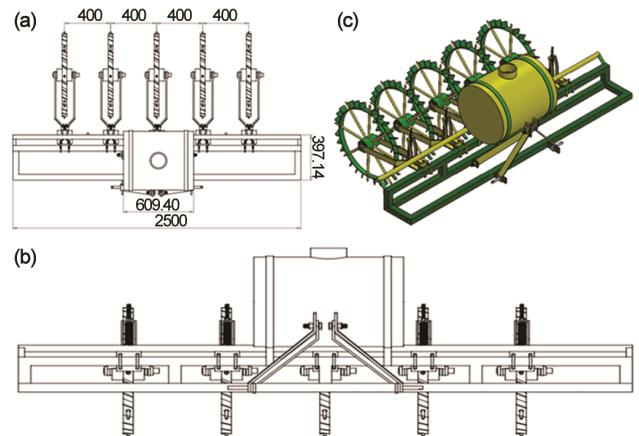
Drawing (2D) views of the developed machine a) top; b) front; and c) isometric view (all dimensions in mm).
